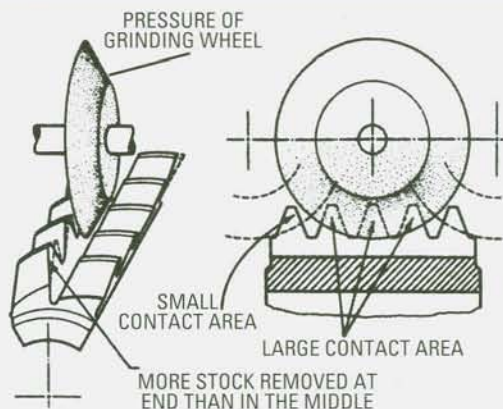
Flute grinding with the flat side of the grinding wheel as shown is not recommended. For uniform cutting pressures and uniform stock removal, the cone side of a saucer-shaped wheel should be used.
